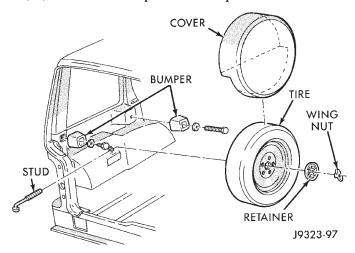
Tire Stand-Offs—Left Quarter Trim Panel
